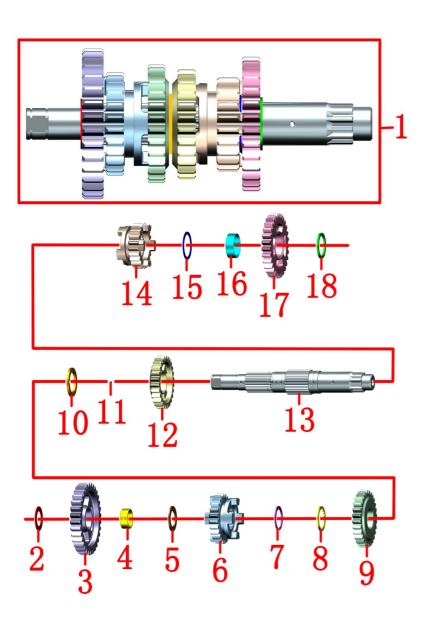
GEARSHIFT AND TRANSMISSION		Countershaft assembly relationship	CHK	Q
